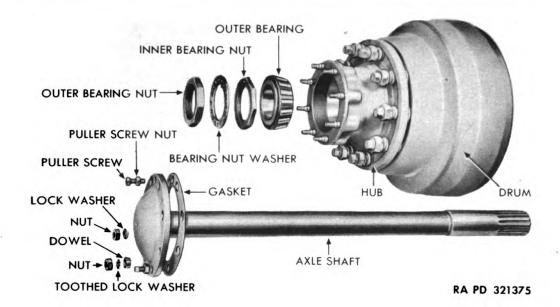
Rear Hub, Axle Shaft, Drum, and Wheel Bearing
